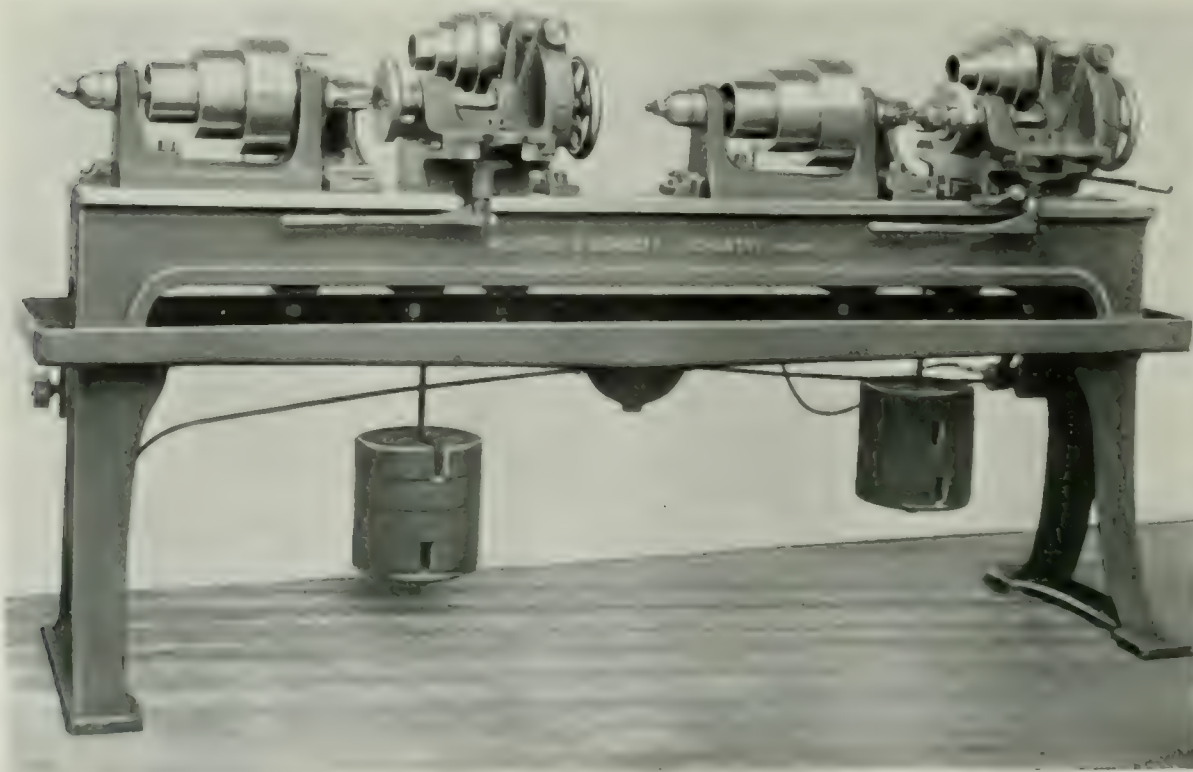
FOUR-FLUTED HORIZONTAL TOOTH MILLING MACHINE.
